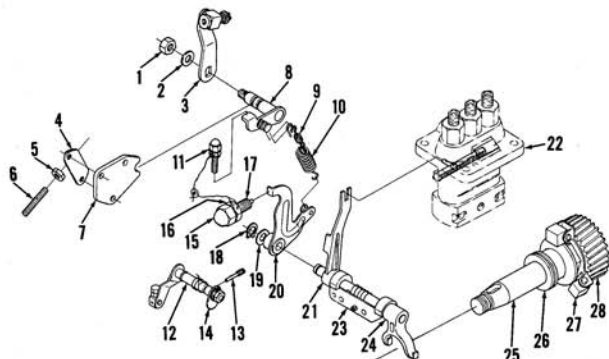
Exploded view of fuel control system used on Yanmar marine diesel engines.
